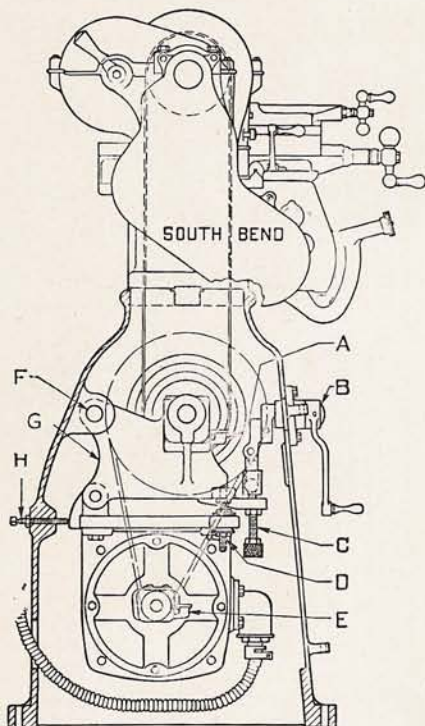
Cross Section End View of Underneath Belt Motor Driven Lathe.
